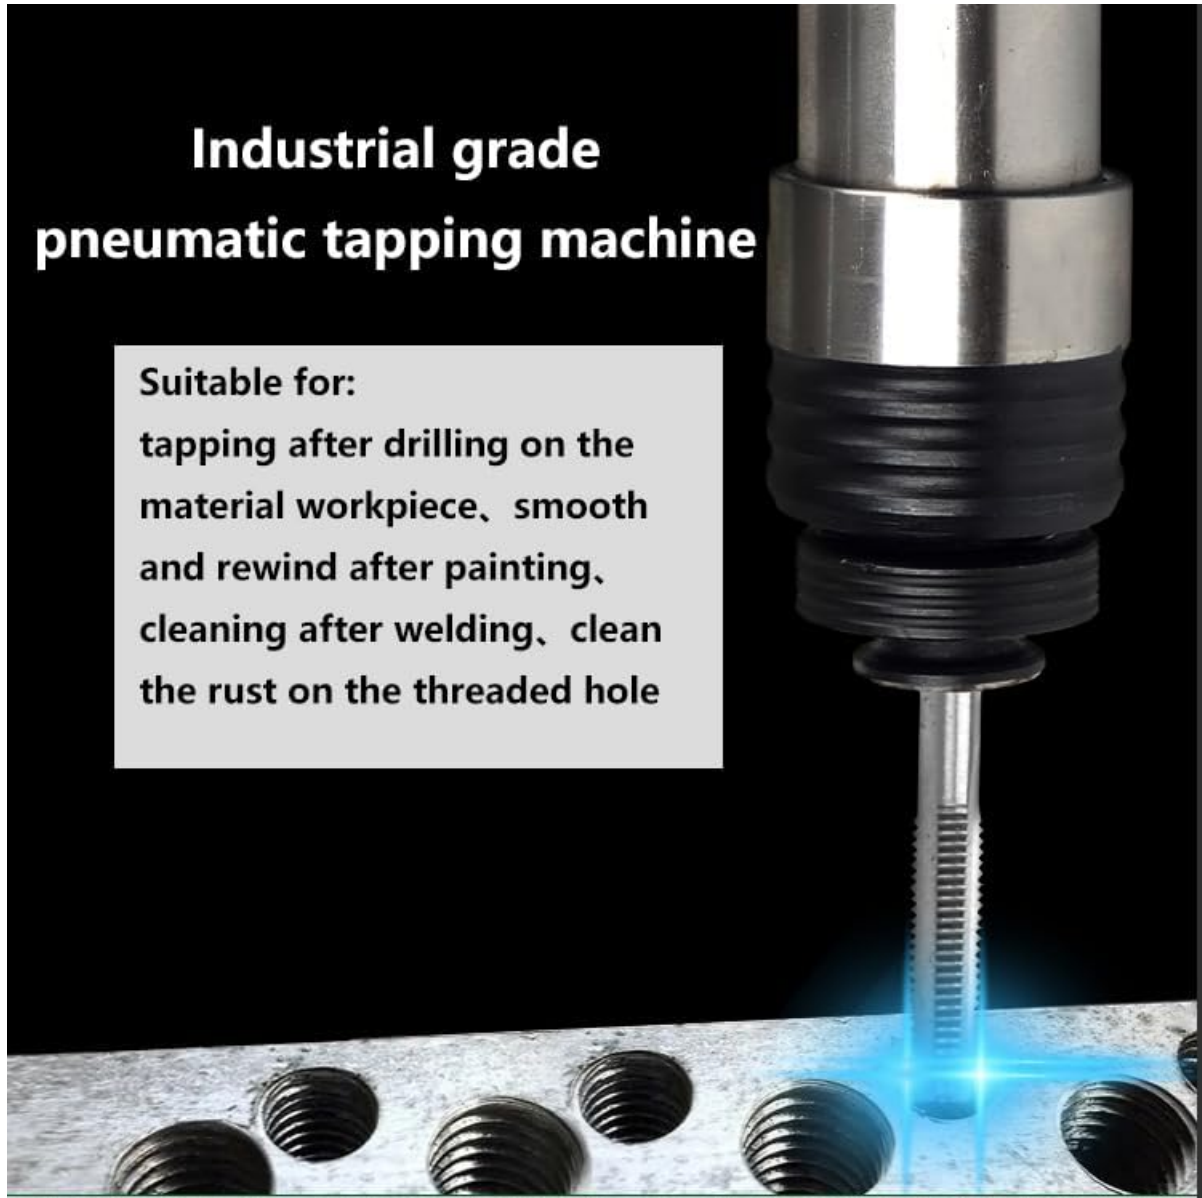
An industrial-grade pneumatic tapping machine performing a tapping operation. This image highlights its suitability for various tasks including tapping after drilling, cleaning threads, and correcting deformities.
